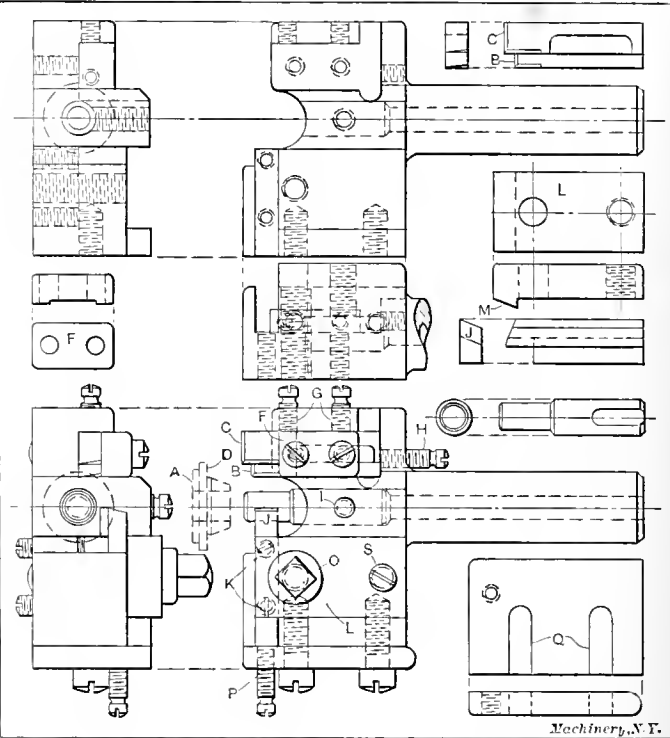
Box-tool for Finishing Another Type of Ball Bearing Cone
